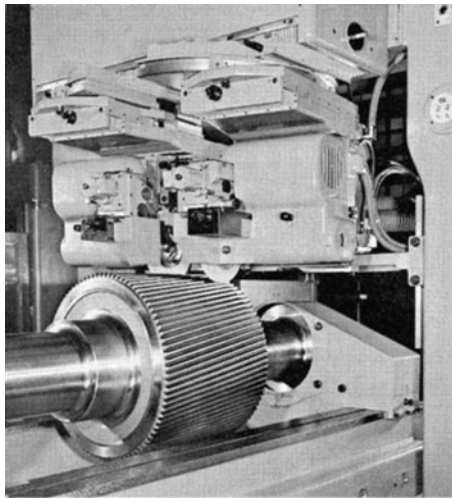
Close-up view of saucer-shaped grinding wheels and work.
